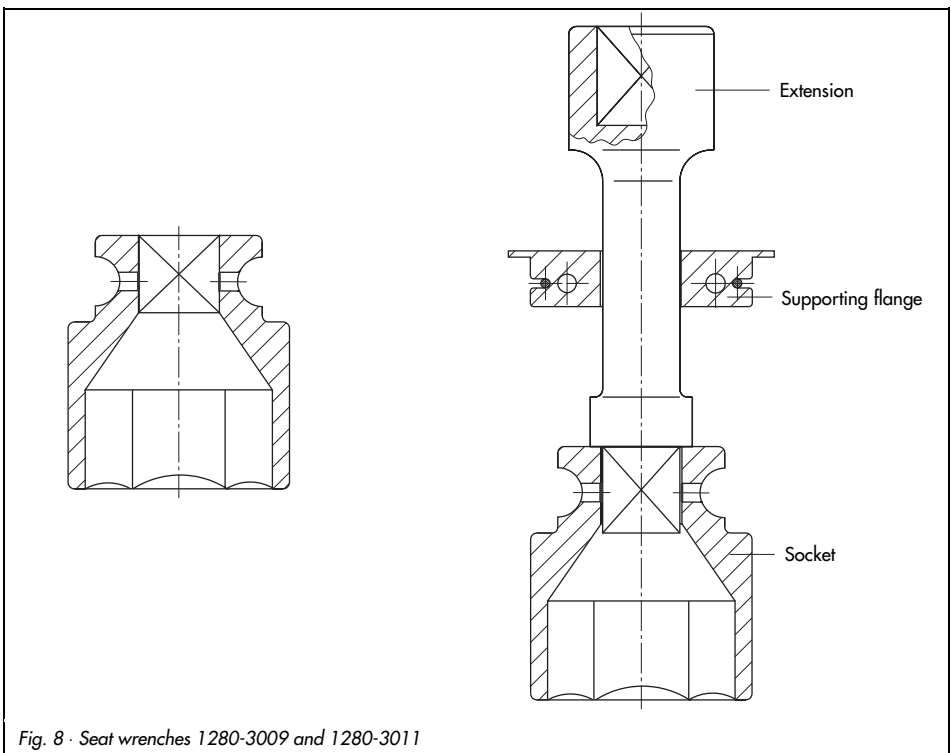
· Seat wrenches 1280-3009 and 1280-3011
